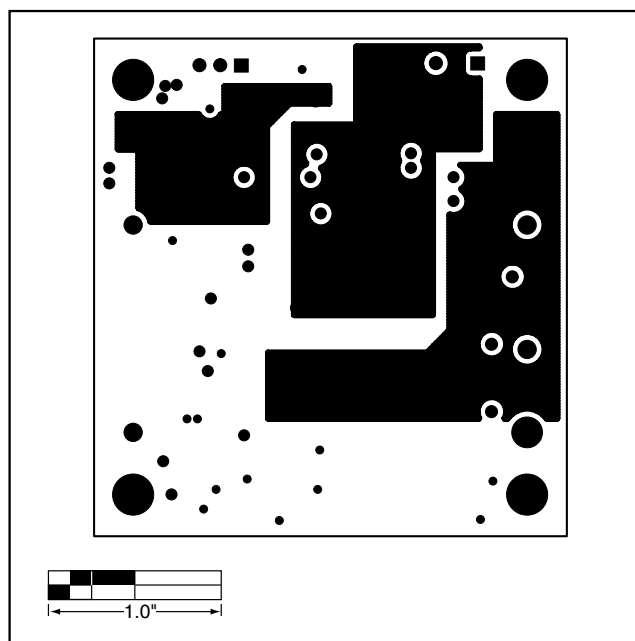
MAX5015 EV Kit PCB Layout—Inner Layer, Power Plane
